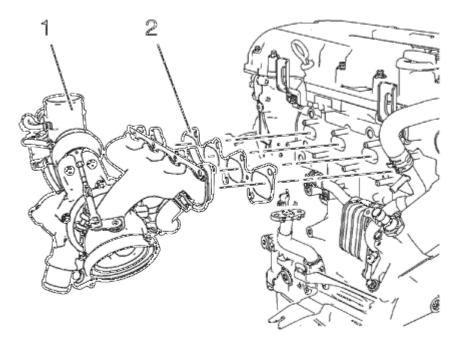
Turbocharger Assembly And Gasket Courtesy of GENERAL MOTORS COMPANY
